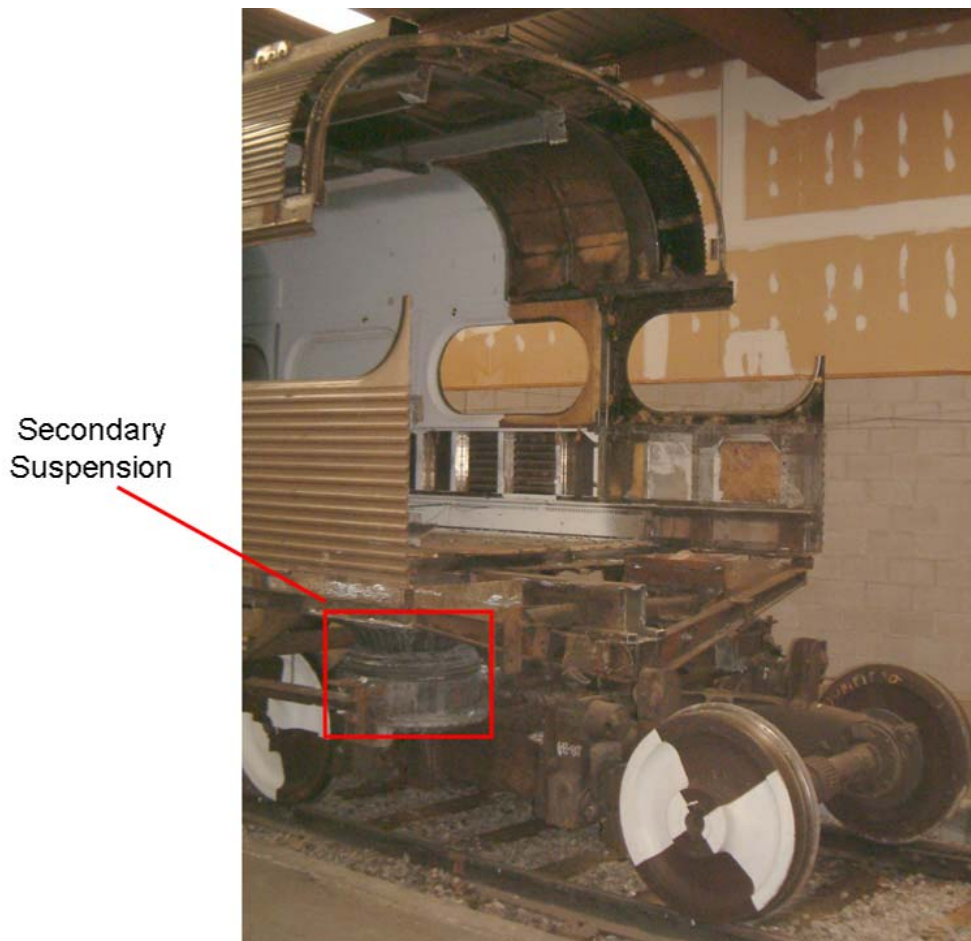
Sectioned Railcar Displaying Body Bolster and Truck Assembly
